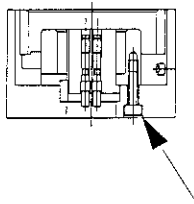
Fabricated handling tool for 2nd step connector
